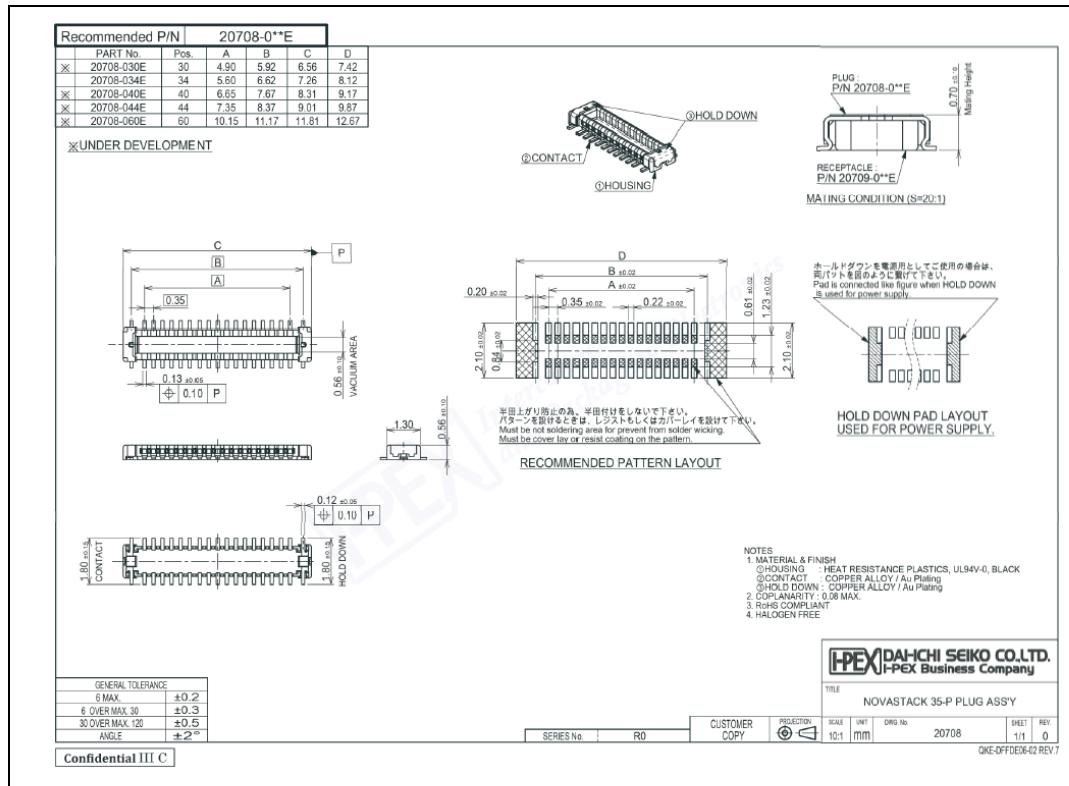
Plug Mechanical Drawing (50 pin Camera and 24 Pin Tracking Module Plug)
